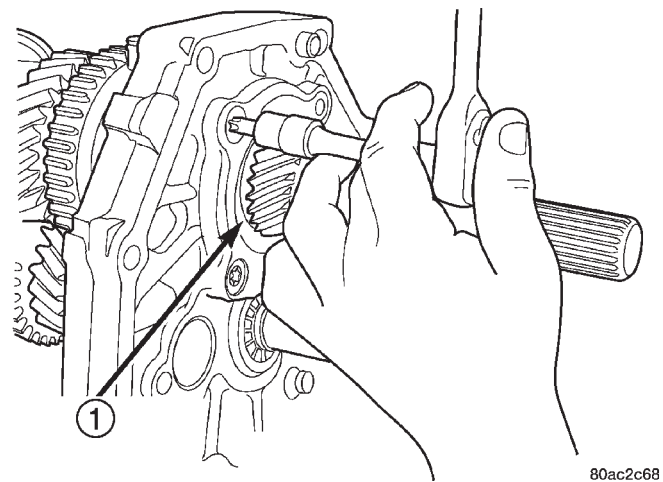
Remove Output Shaft Rear Bearing Retainer
